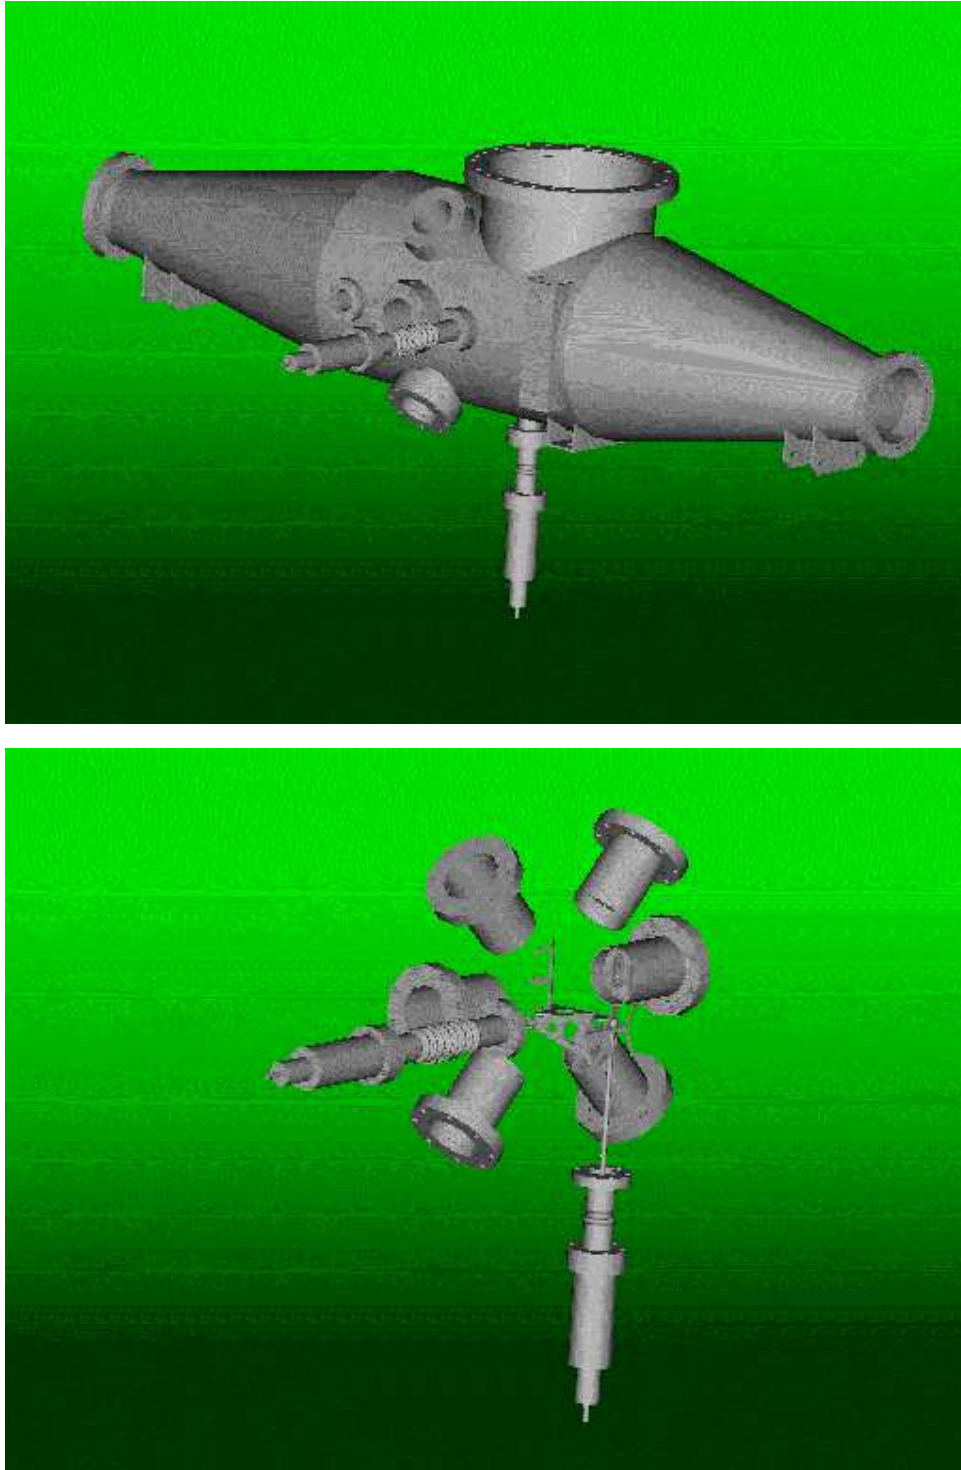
RHIC CN1 polarimeter target box. Top is assembly view and bottom is exploded view. Beam goes from the left to the right.
